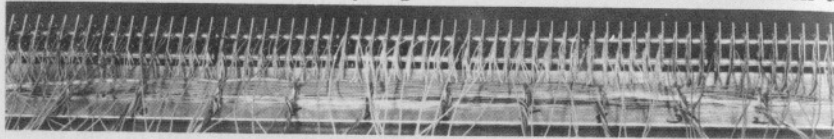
A completed Great key-switch assembly ready for installation.
